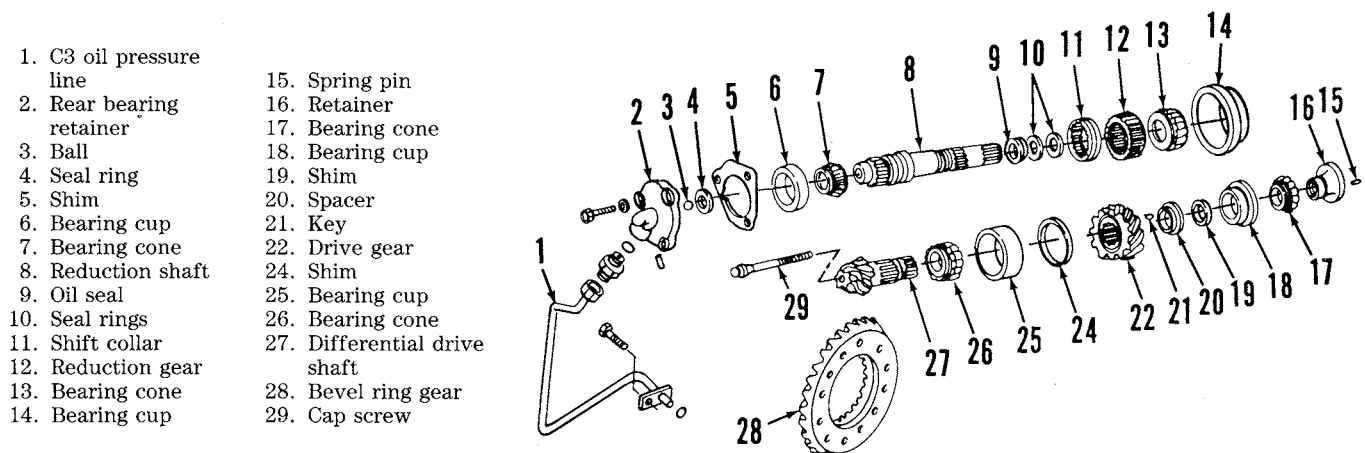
Exploded view of output gear reduction shaft and differential drive shaft used on 4050, 4250 and 4450 Power Shift models. Refer to Fig. 183A for 4650 and 4850 models.
